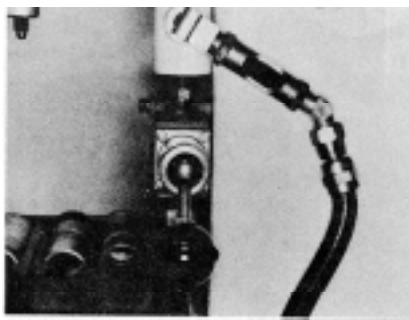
, F60133. Hydraulic fluid sight glass
